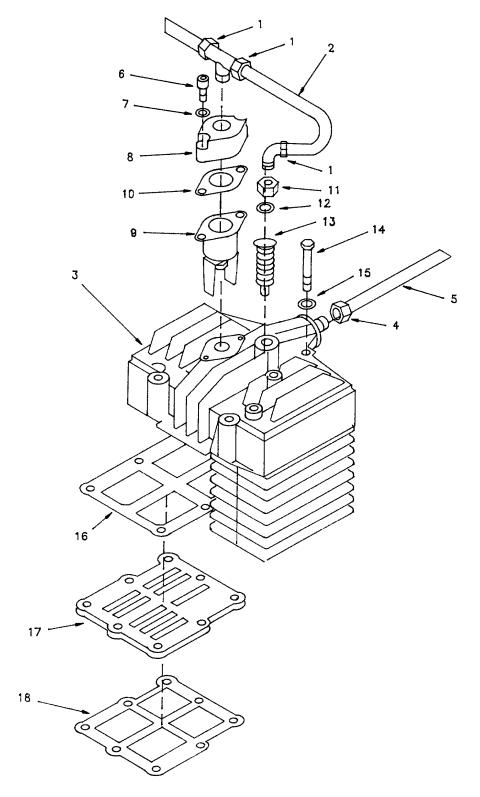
<u>Compression Valve Plate and Unloaders.</u>
